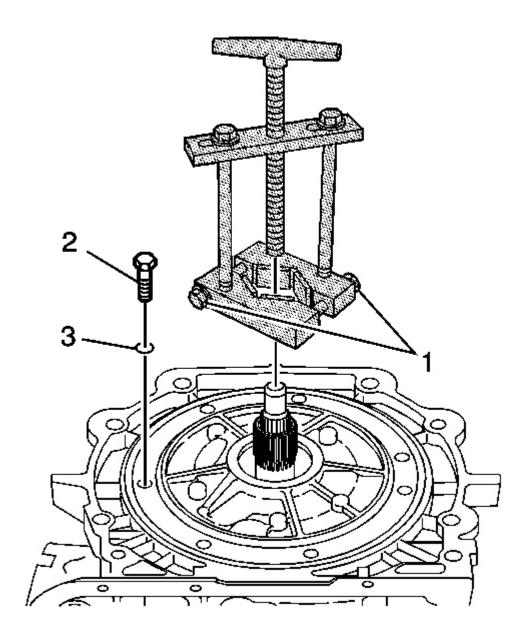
Locating Pump Bolts & Seals Courtesy of GENERAL MOTORS CORP.
